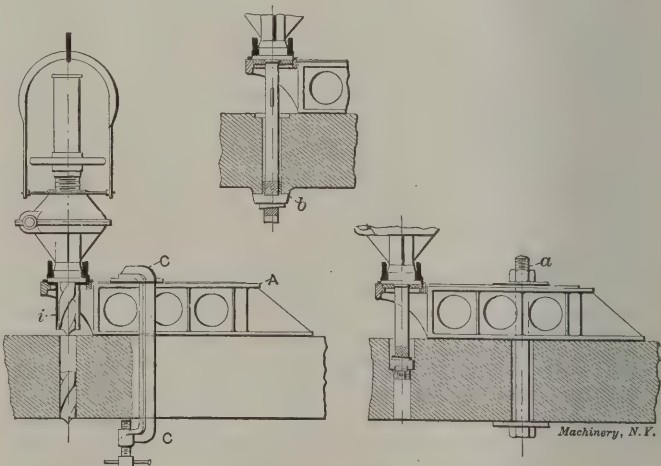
Showing Use of Tool with Guide Bushing for Accurate Drilling also Counterboring and Back Facing.
